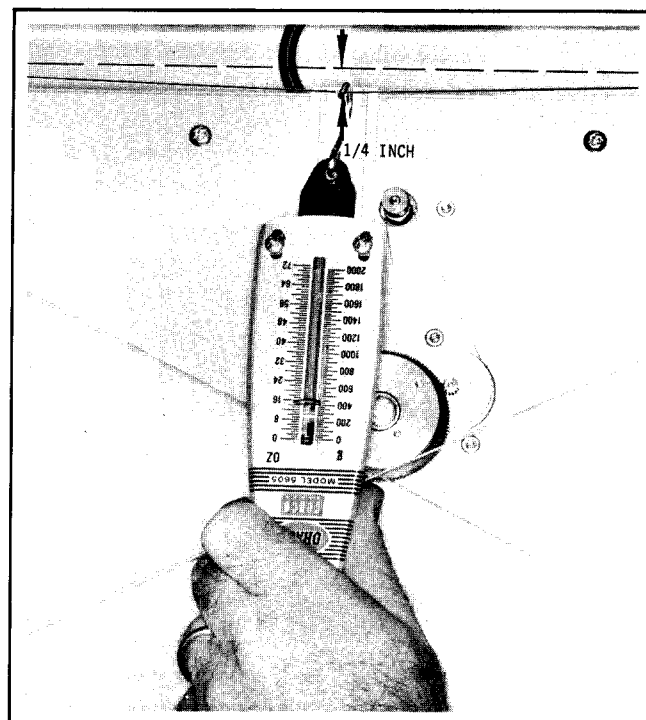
X-AXIS CABLE TENSION CHECK
